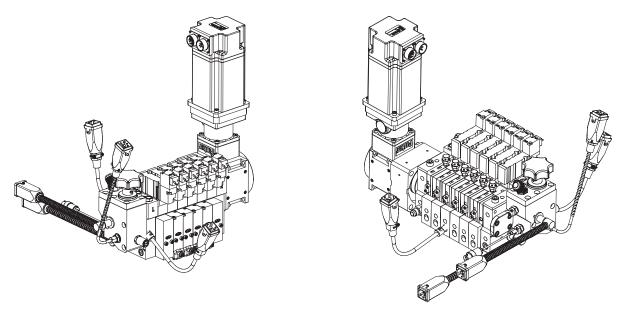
Typical Universal slice applicator (front and back views of a five-slice applicator with a right-angle drive shown)
